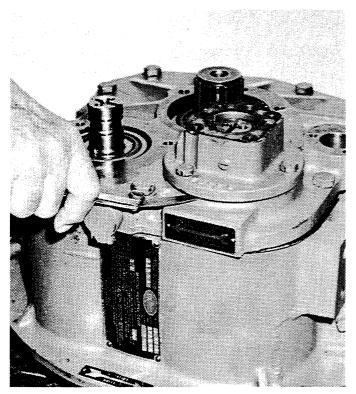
Measuring Shim Space Between Pump Mount and the Rear Cover.
